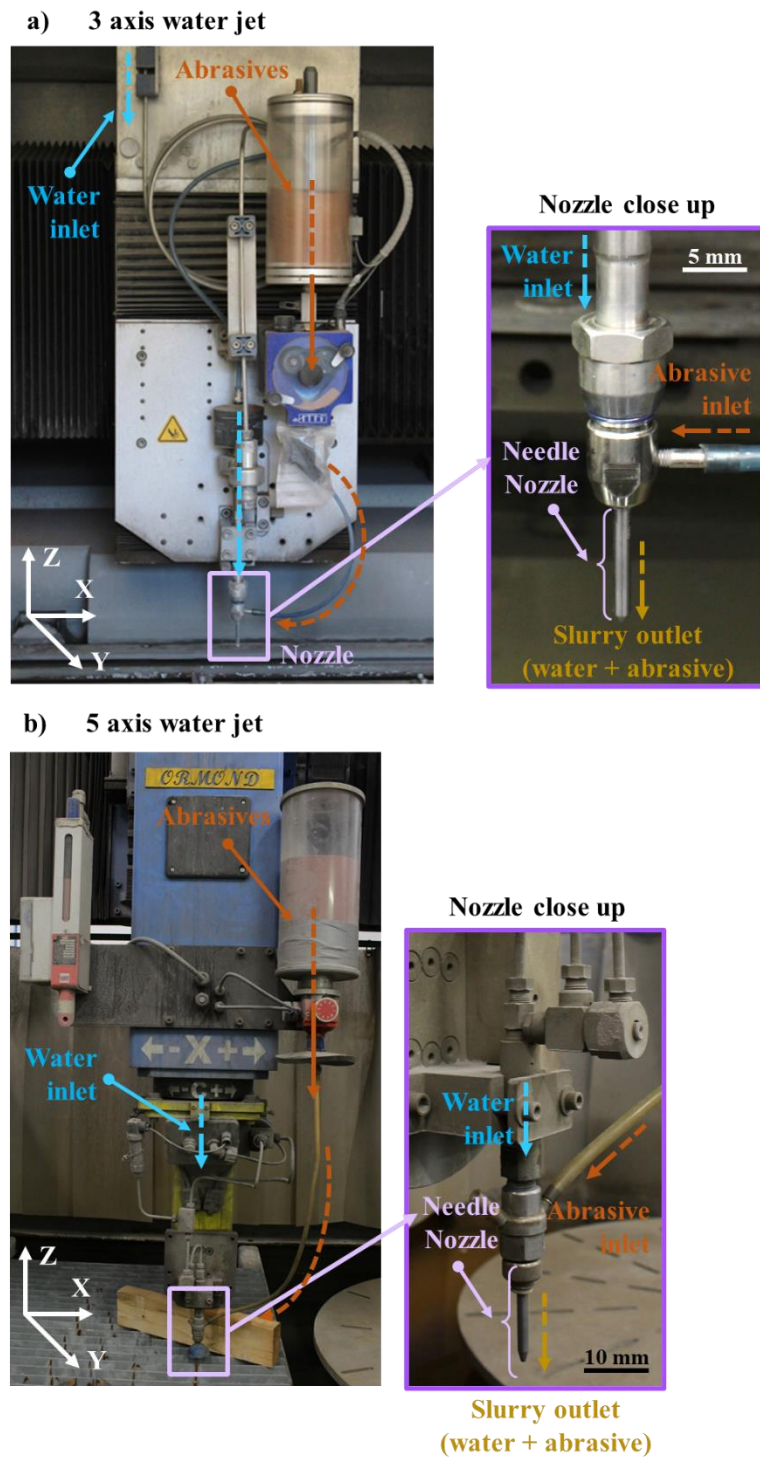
Close up of the distribution system of the AWJ machine in where the abrasive and water inlet as well as the slurry outlet through the needle nozzle for: a) the three-axis WJ machine, b) five-axis WJ machine.
